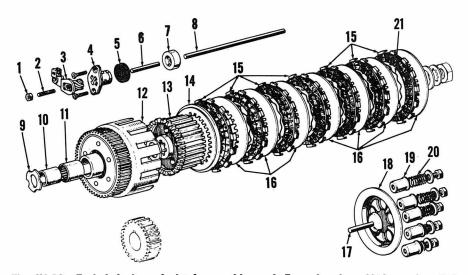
Exploded view of clutch assembly used. Expander rings (21) are installed with friction discs (15) between steel plates (16).
